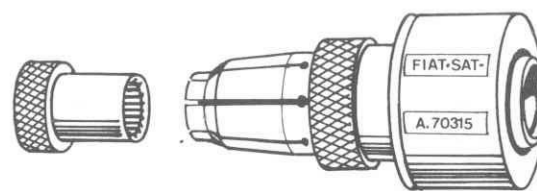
13 A drive shaft is locked to the differential case with tool A.70315
